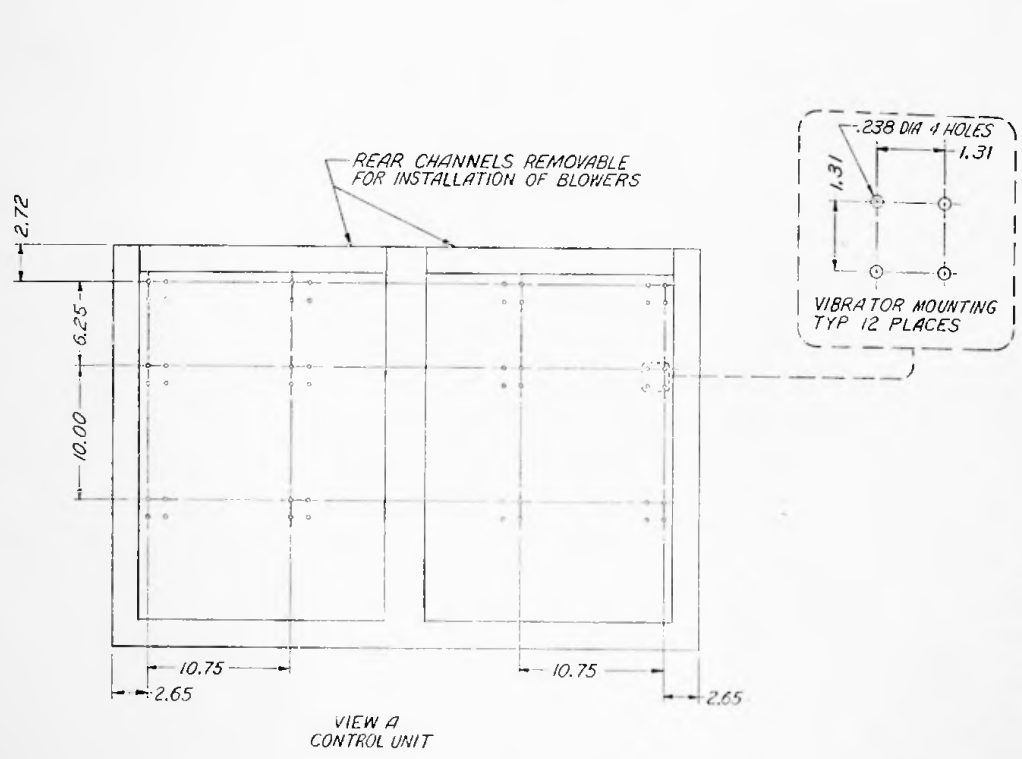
TT-30FL VHF TV Transmitter Installation and Floor Plan (3477327)
